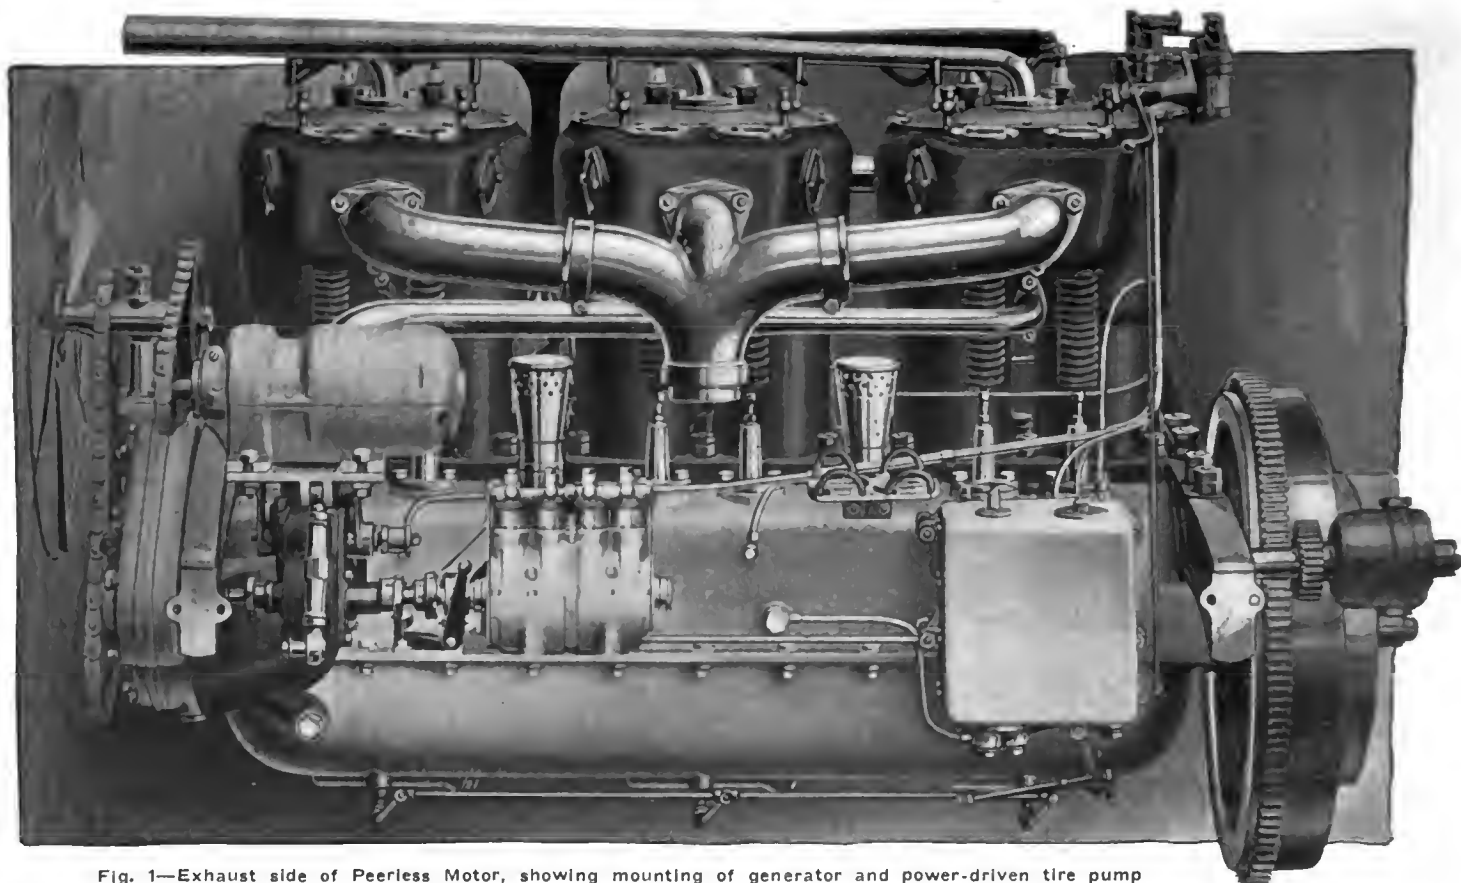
Exhaust side of Peerless Motor, showing mounting of generator and power-driven tire pump
